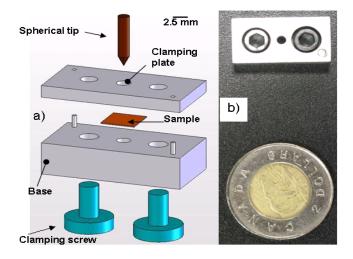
a) Schematic of the film bending fixture; b) top view of the fixture.
